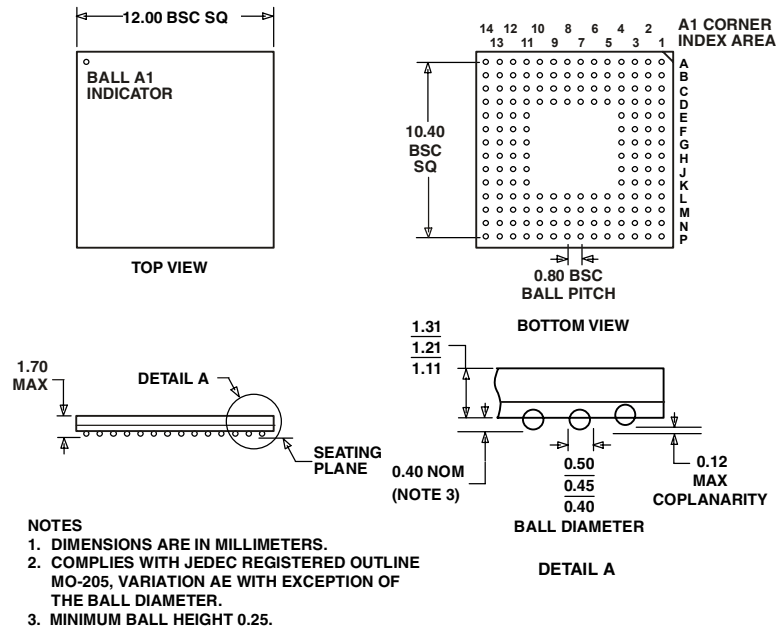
Chip Scale Package Ball Grid Array (Mini-BGA) BC-160
